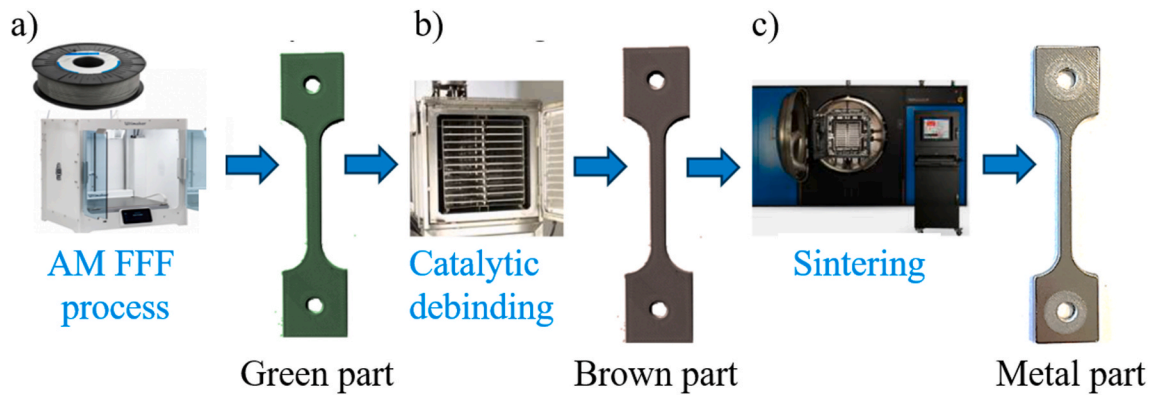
Manufacturing steps: (a) printing process; (b) debinding stage; (c) sintering process.
